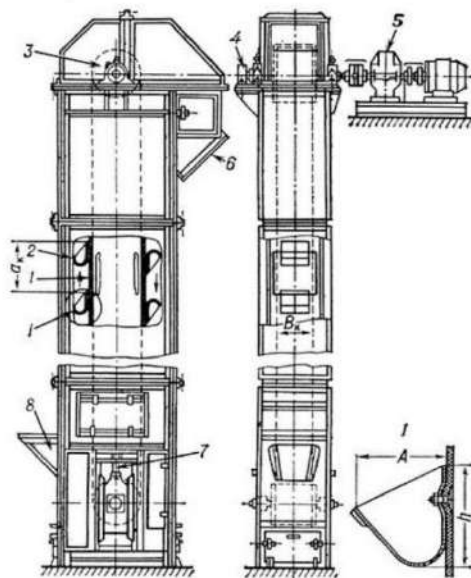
Vertical belt bucket elevator: 1 — traction body; 2 — bucket; 3 — drive drum; 4 — brakes; 5 — drive; 6 — discharge pipe; 7 — tensioner spindle; 8 — loading pipe.
